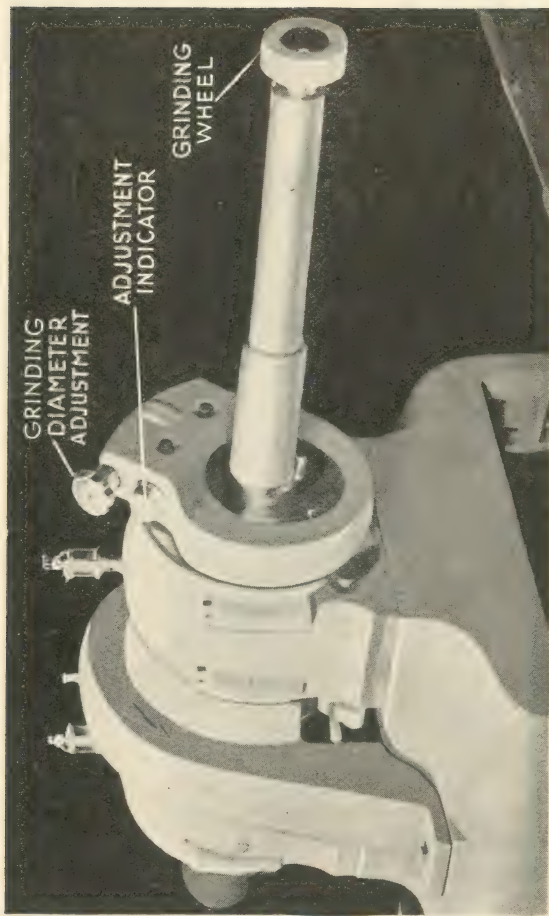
TYPICAL CYLINDER GRINDING HEAD, WITH ECCENTRIC ADJUSTMENT FOR GRINDING DIAMETER (HEAD)
